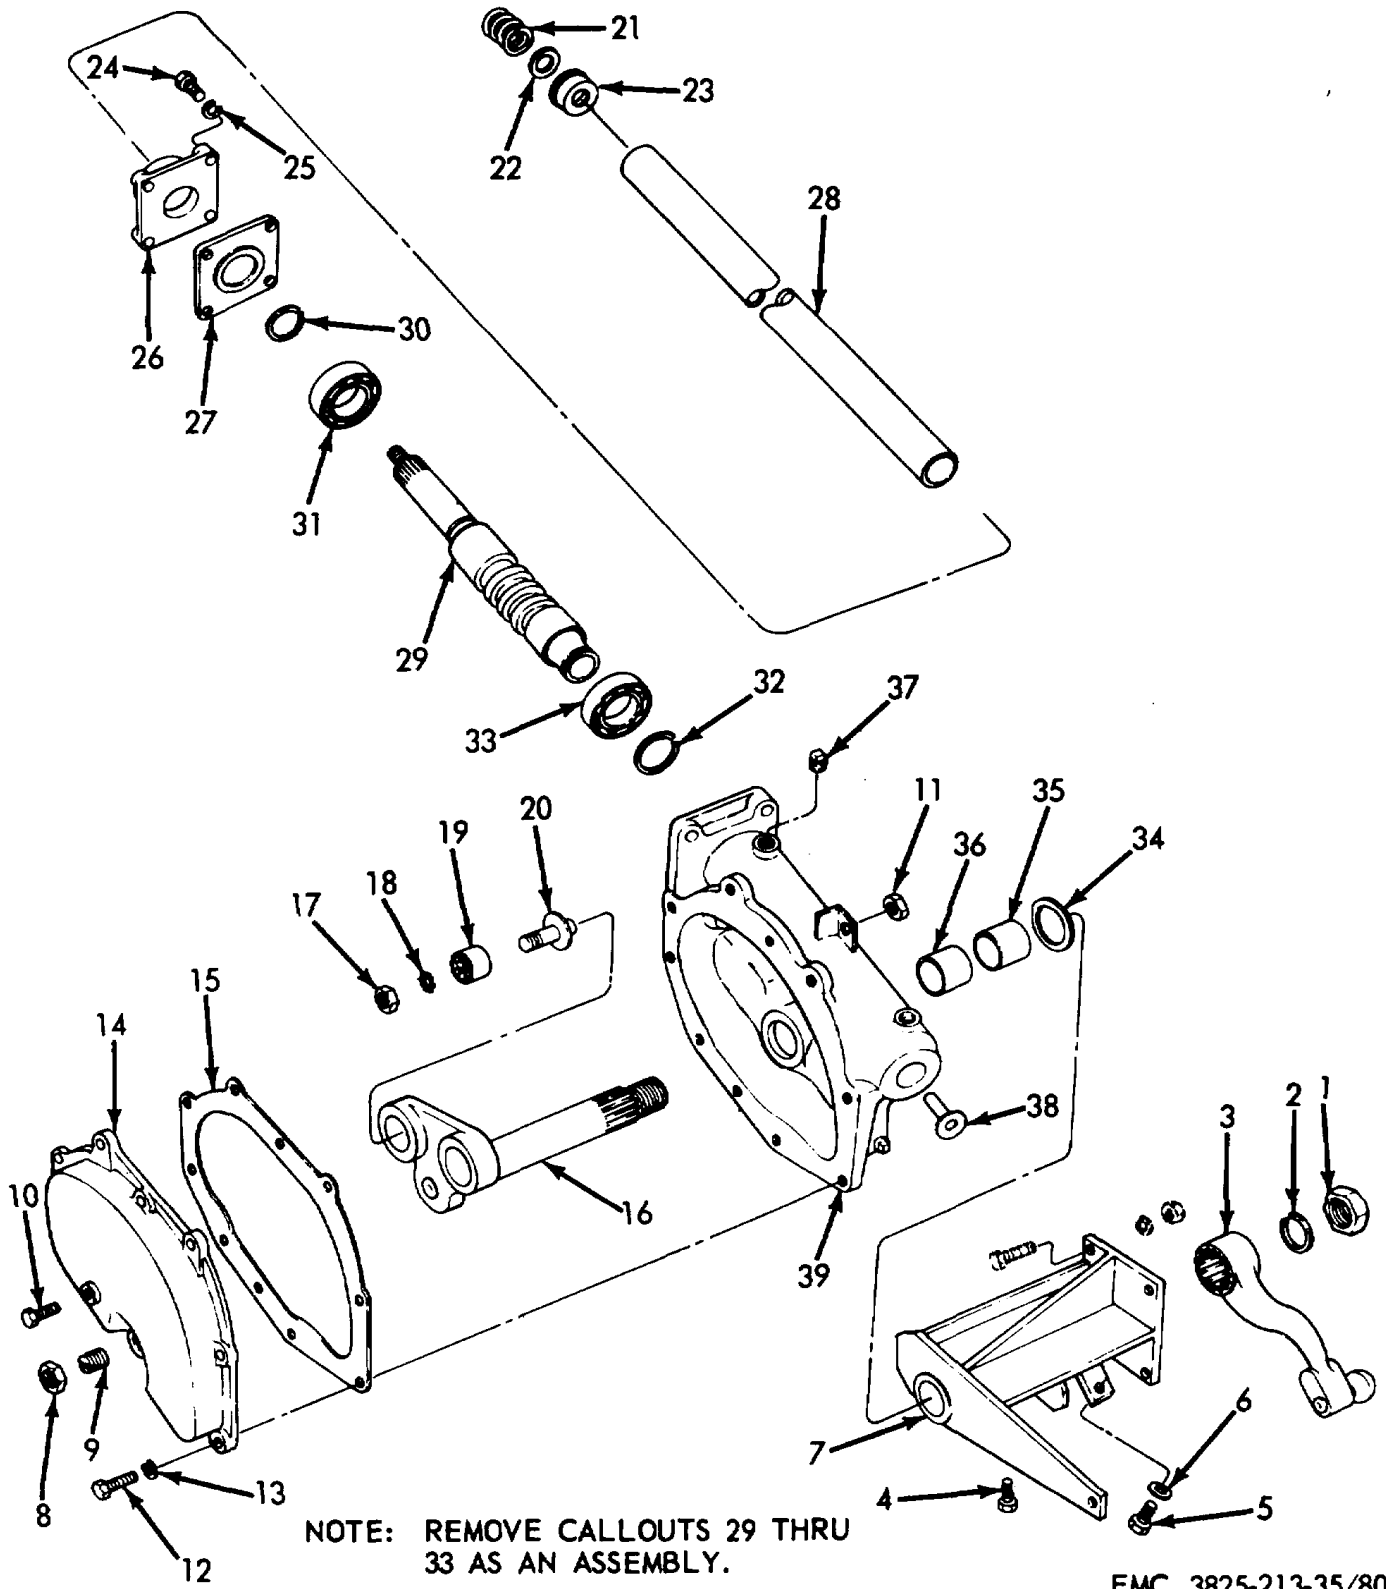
Steering gear assembly, disassembly and reassembly, exploded view.
